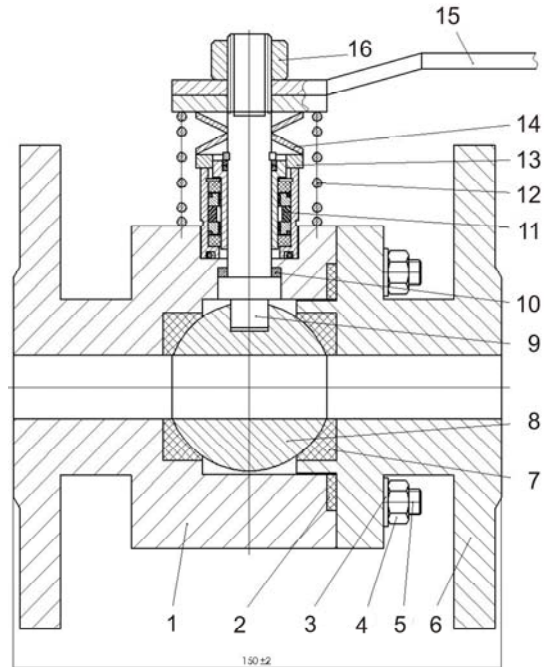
Sketch of ball valve with MF seal; Components: 1 – Body; 2 – Gasket; 3 – Grower washer N6; 4 – Screw Nut; 5 – Joint pin; 6 – Flange; 7 – Spherical Gasket; 8 – Ball; 9 – Shaft; 10 – Bearing; 11 – MF seal; 12 – Cylindrical spring; 13 – Distance piece; 14 – Disc spring; 15 – Handle; 16 – Screw nut M14;
